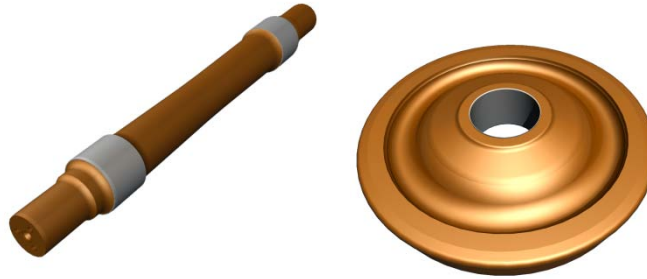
Axle wheel seat and wheel bore areas shown in gray
